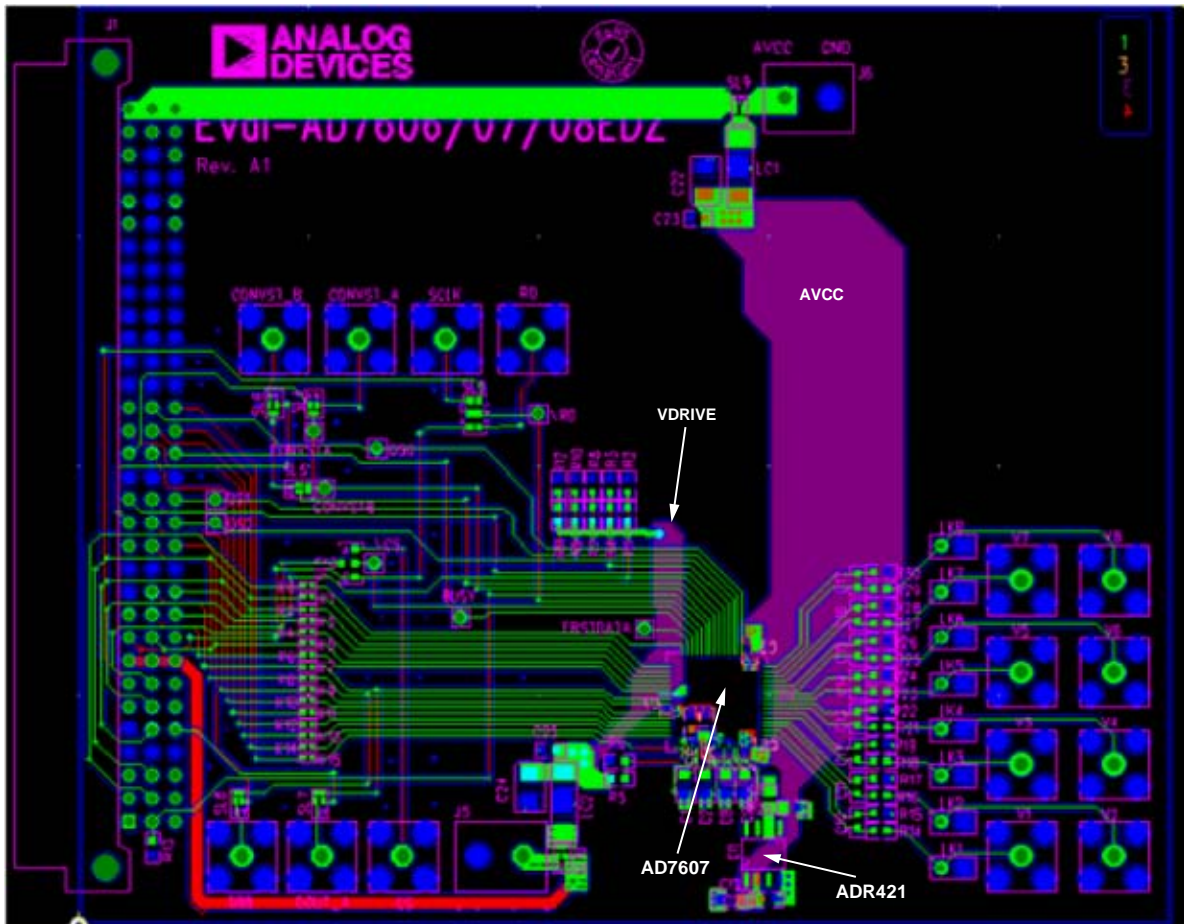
PCB Layout Showing the AD7607 DAS and ADR421 Reference
